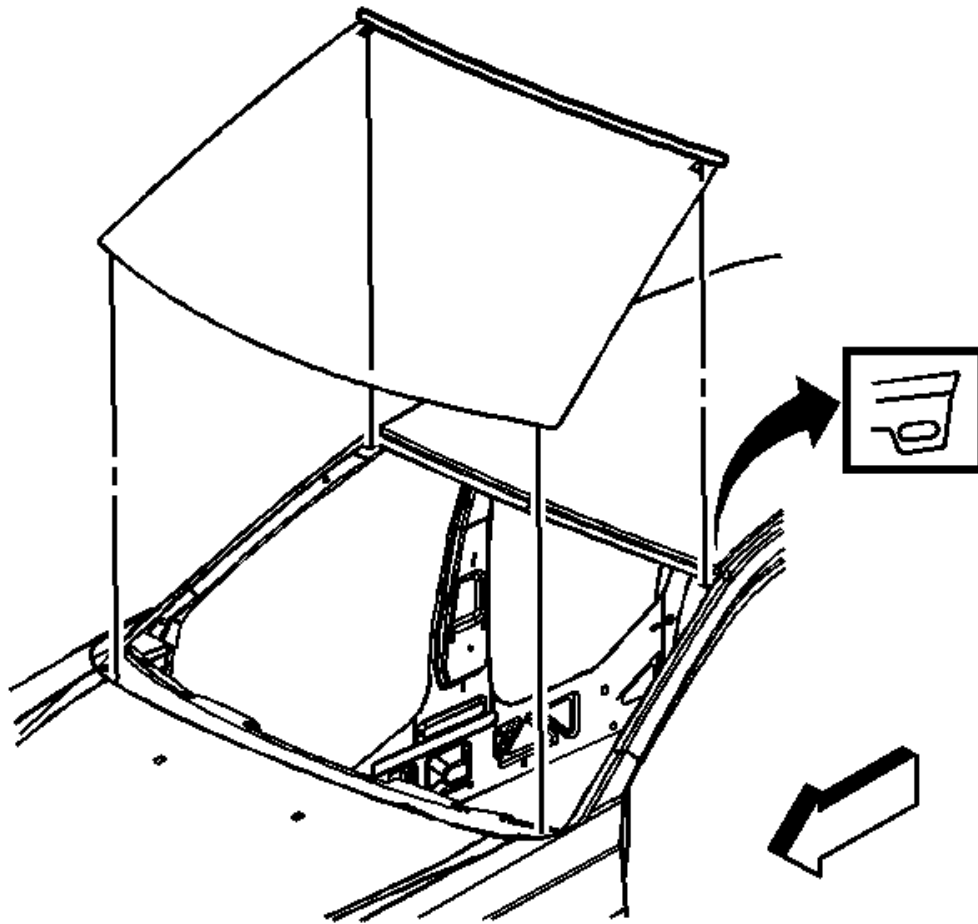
Identifying Locator Slots On Upper Pinch-Weld Flange
